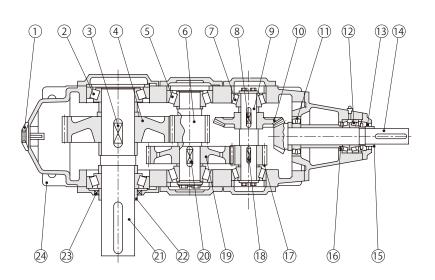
Horizontal Right Angle Shaft Triple Reduction
